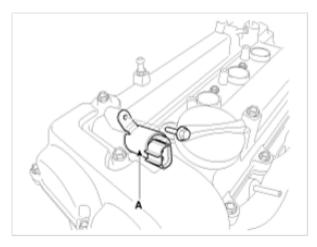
Identifying Exhaust Oil Control Valve Courtesy of HYUNDAI MOTOR AMERICA
